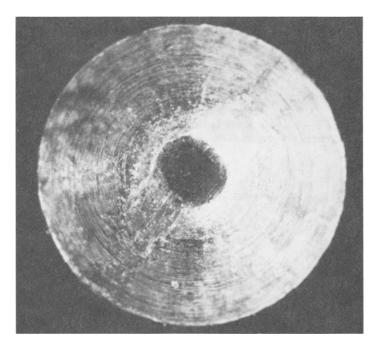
Zipco pin tumbler from a lock cylinder that had been operated 5000 times with the key. Pin diameter is 2.92 mm (0.115 in.).
